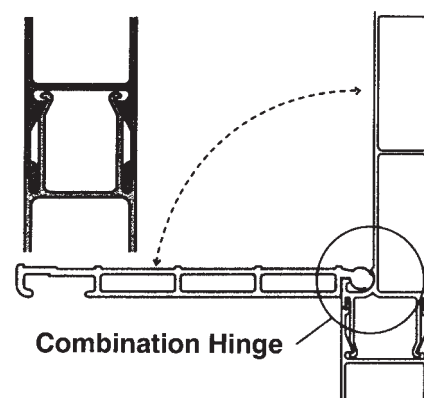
Example of fitting system on aluminum side board for commercial vehicle made of extruded sections.
